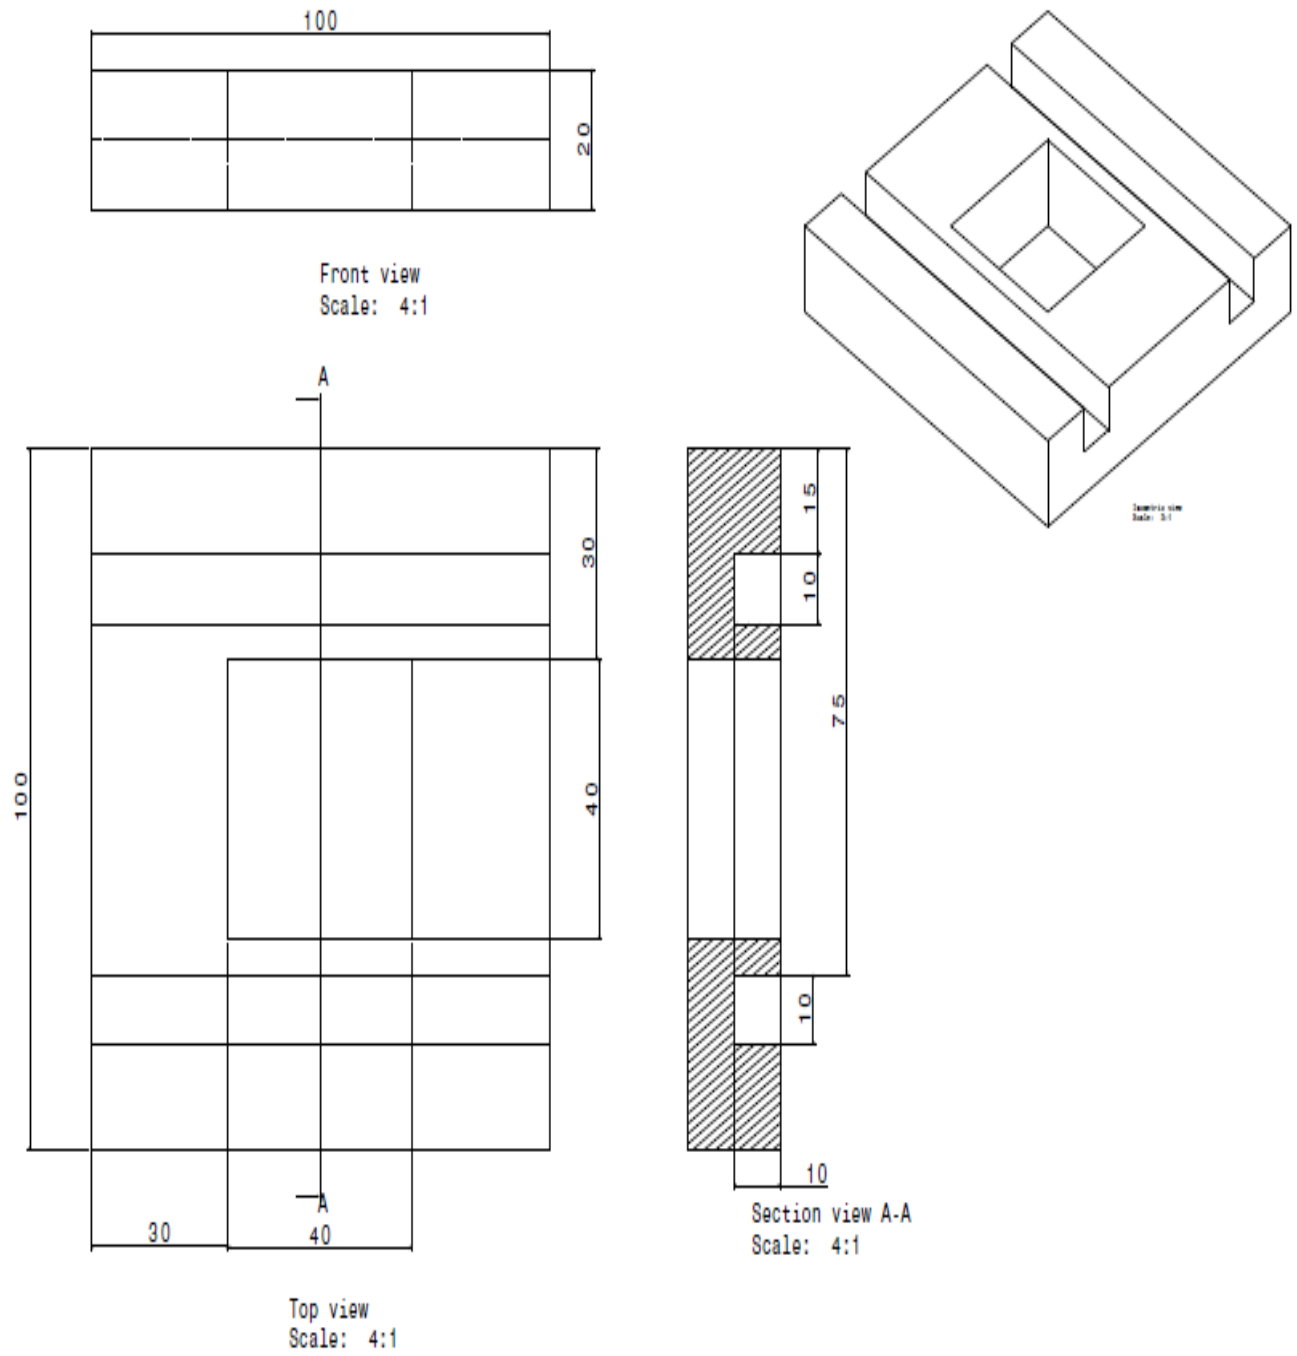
Drawings for the bottom block of sliding apparatus.
